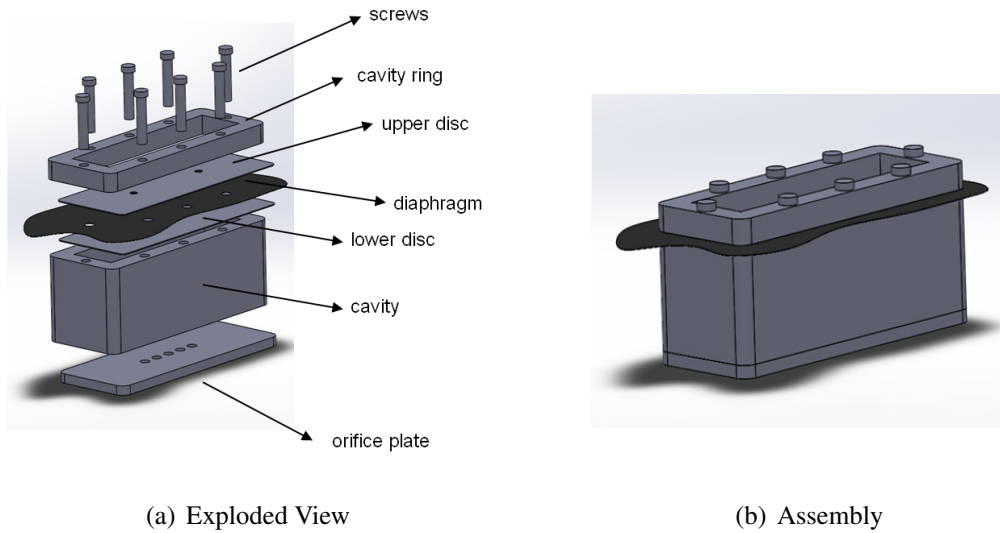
Technical drawing of the synthetic jet array mounted on a rectangular cavity
